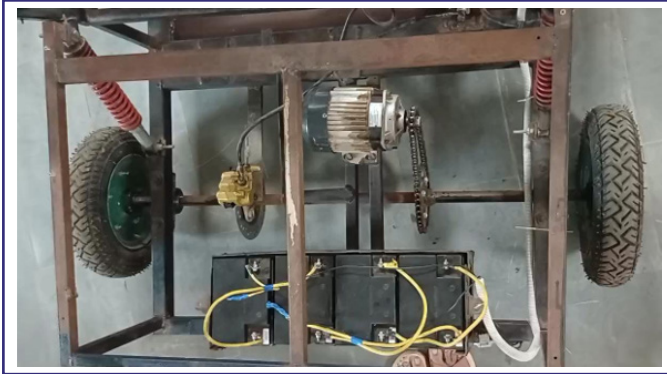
Chassis fabrication and welding process of the proposed electric vehicle prototype.
